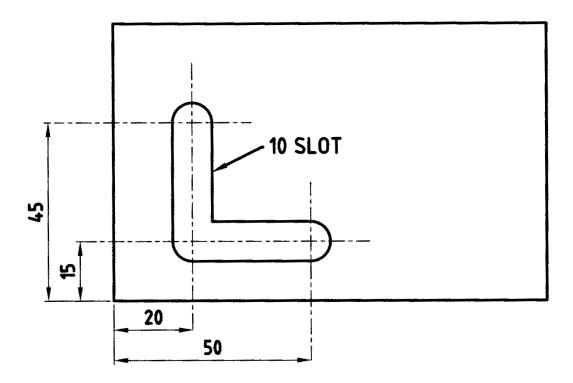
shows an "L" shaped slot in a component. The slot will be milled on a CNC milling machine, using a Ø10 slot drill, to a depth of 5 mm.
